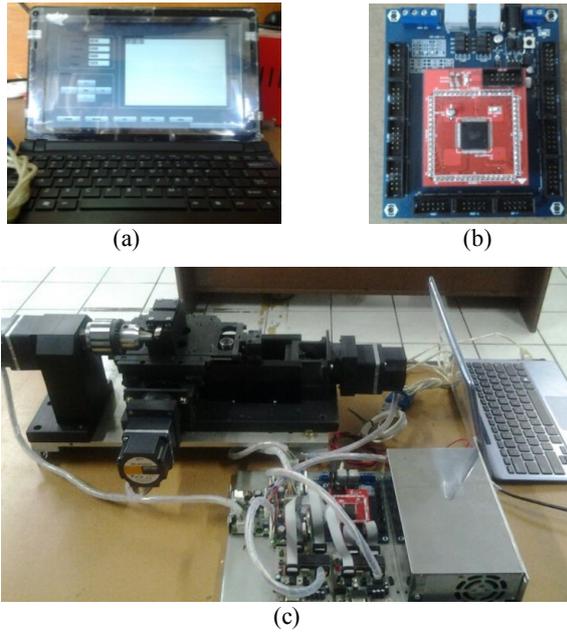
Processing unit as the control system of the prototype; (a) main processing unit; (b) secondary processing unit; (c) complete prototype of the distributed control system on CNC lathe machine
